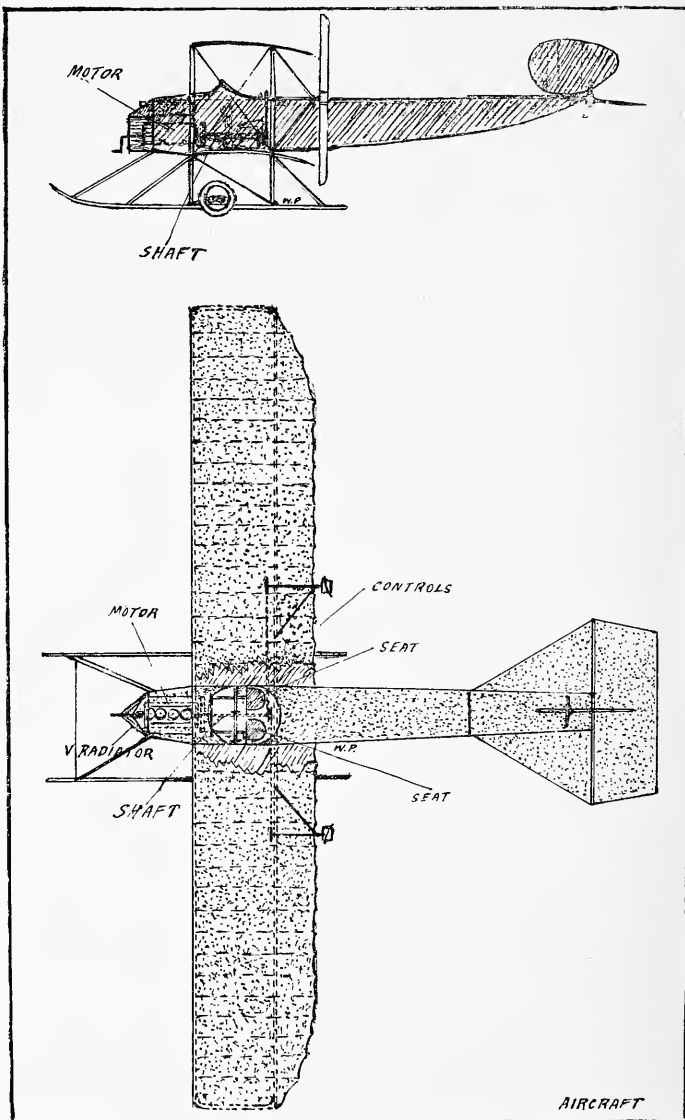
SUGGESTED DESIGN FOR A WRIGHT TYPE MACHINE WITH THE MOTOR IN FRONT AND THE PASSENGERS BEHIND.
